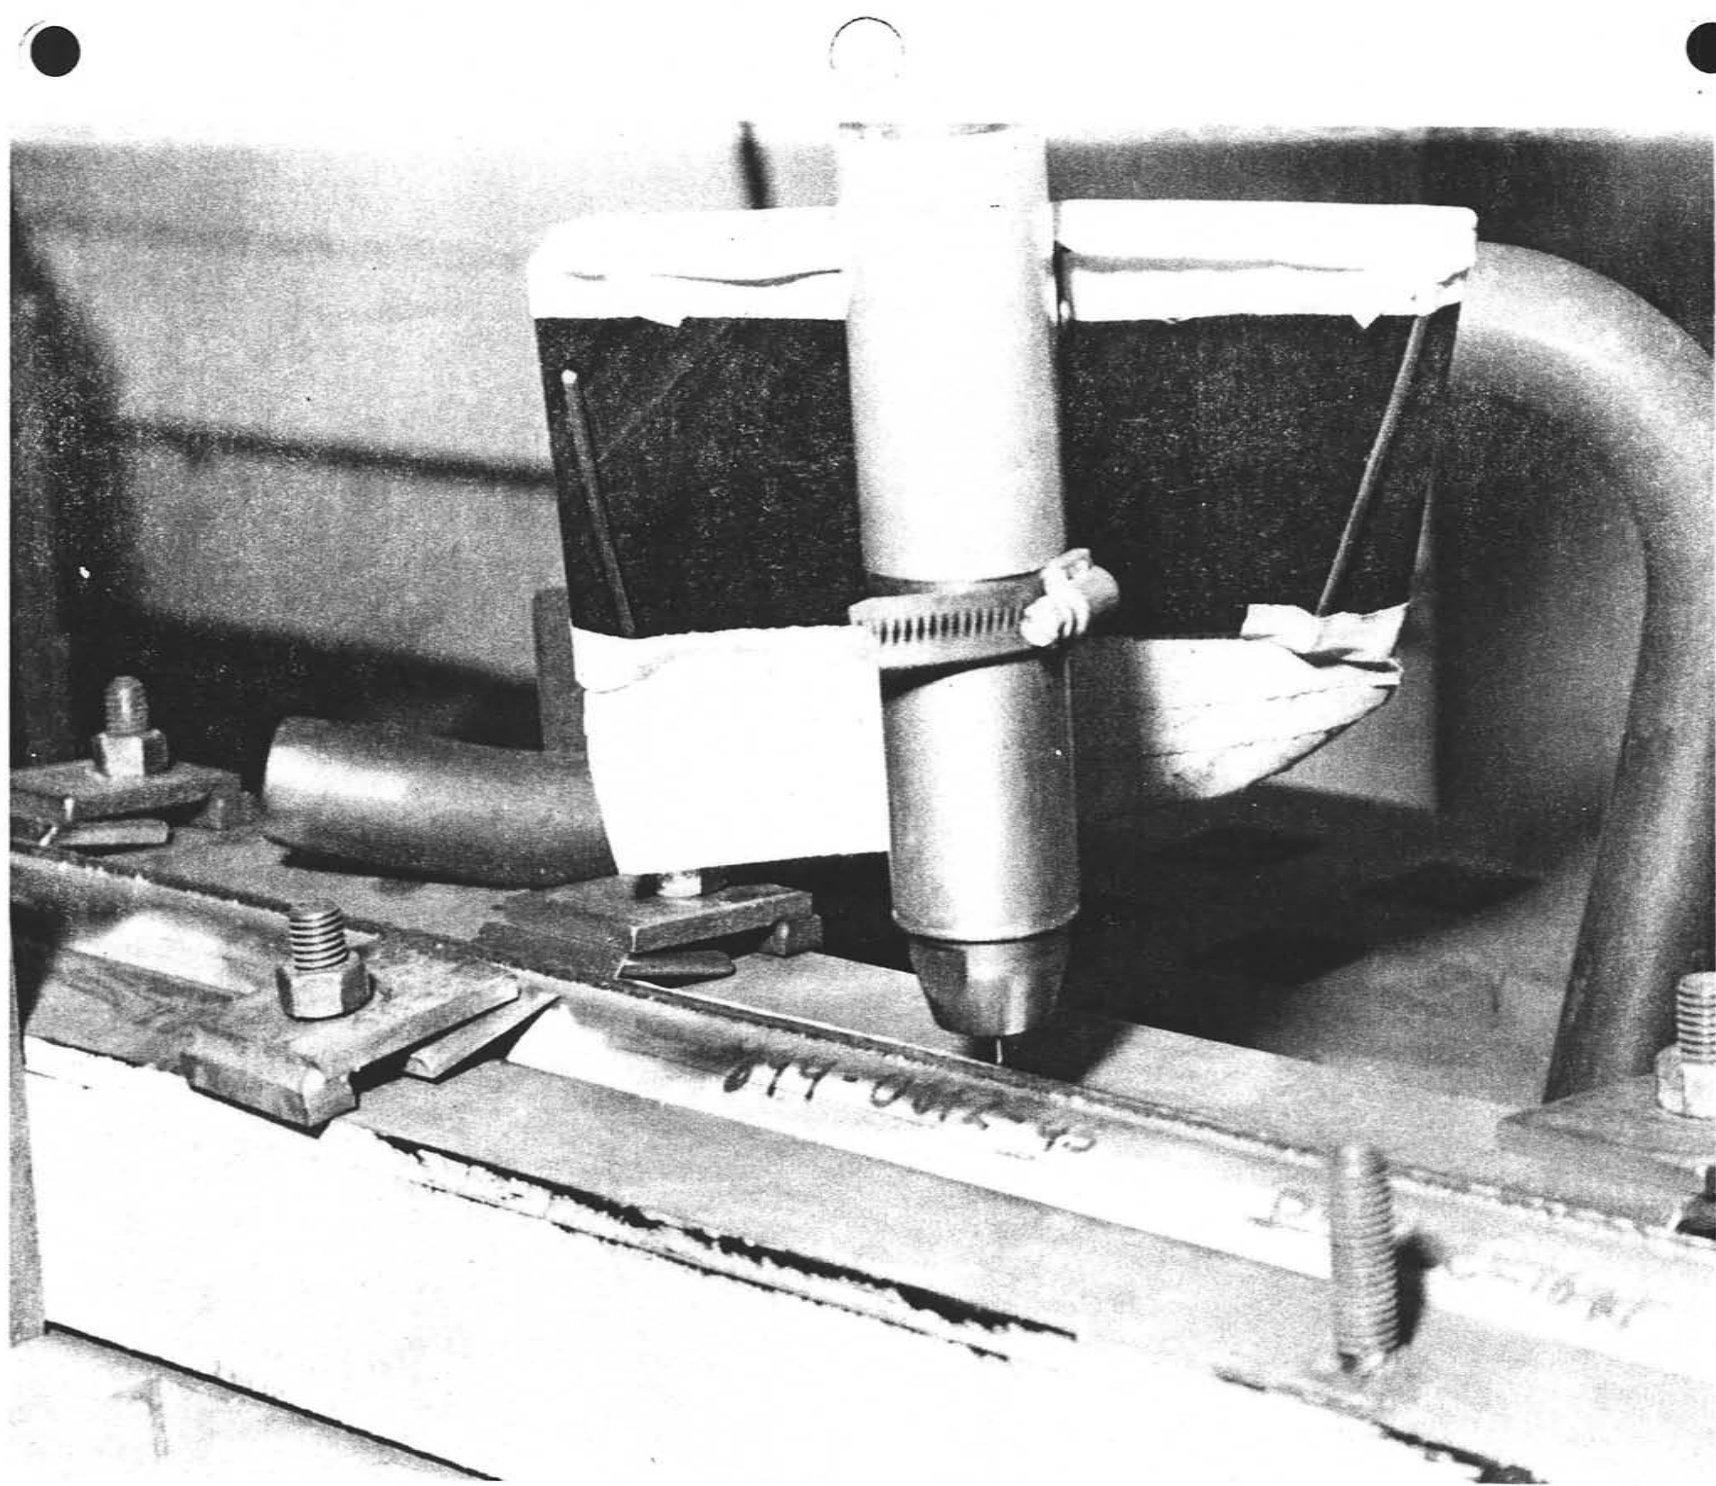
MIG WELD BUILDUP OF MEMBRANE FINS
